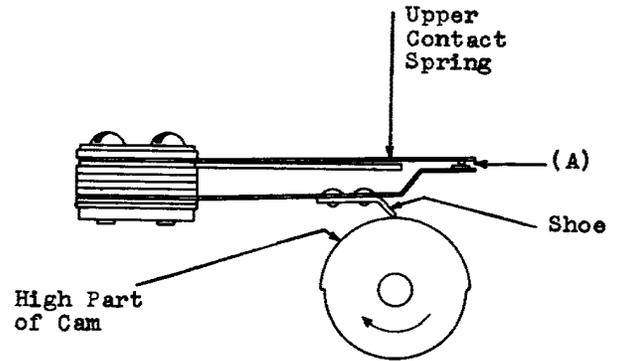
High-speed Cam Assembly — Method of Measuring Contact Pressure
